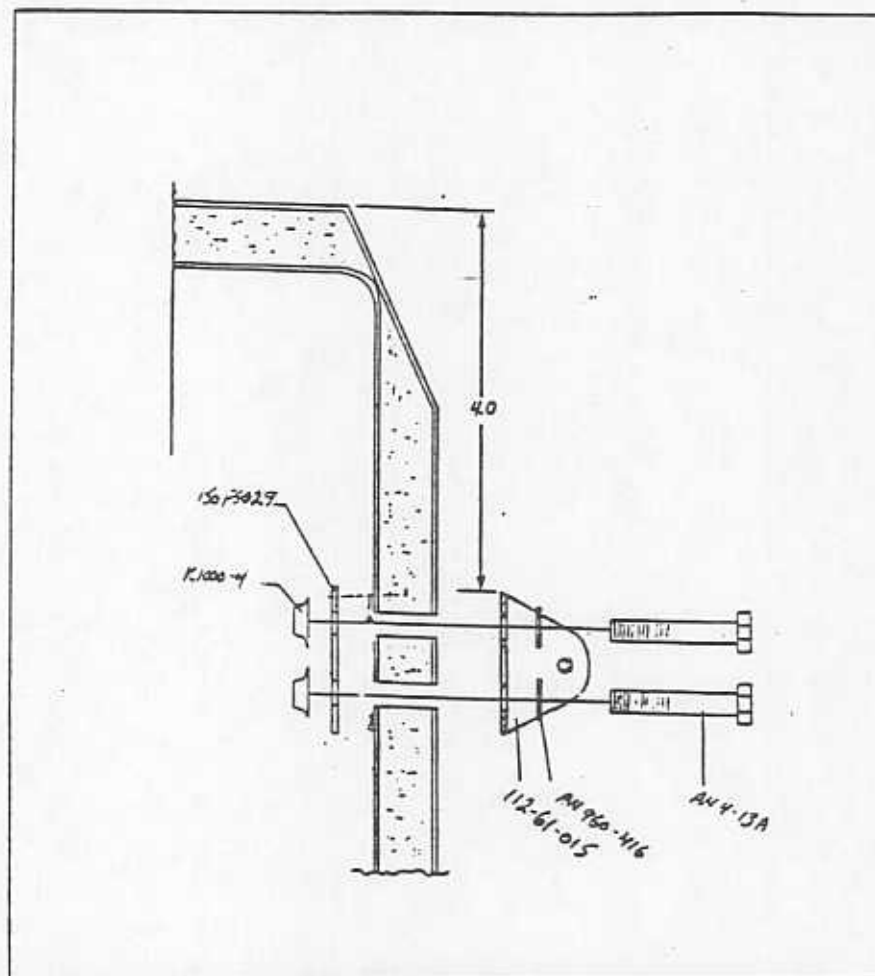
FRONT LAP BELT ANCHOR INSTALLATION
